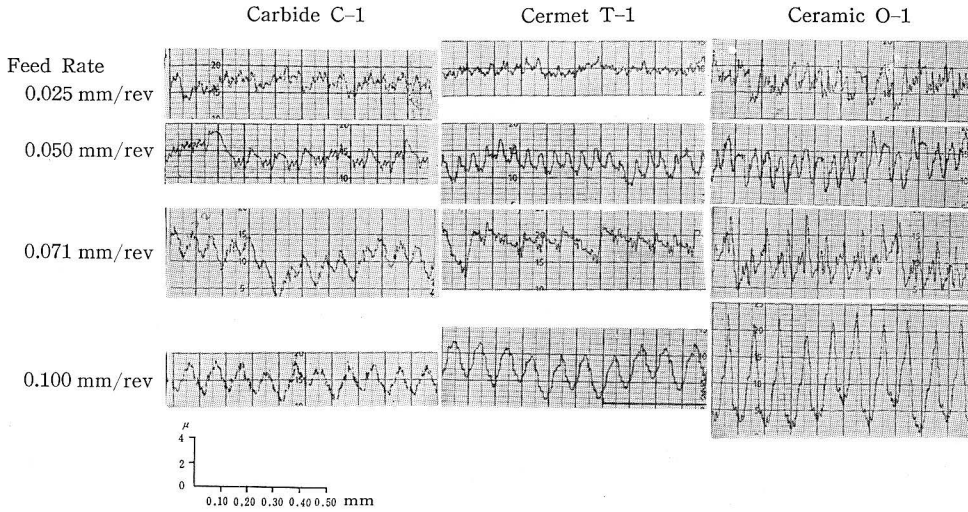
Examples of profile of the machined surface in super-high speed machining [Tool material, carbide C-1 (steel cutting grade), cermet T-1, and ceramic O-1; tool geometry,  $-5^\circ$ ,  $-5^\circ$ ,  $5^\circ$ ,  $5^\circ$ ,  $15^\circ$ ,  $15^\circ$ , 0.8 mm; work material, S45C; cutting speed, 1000 m/min; depth of cut, 0.50 mm; dry]
